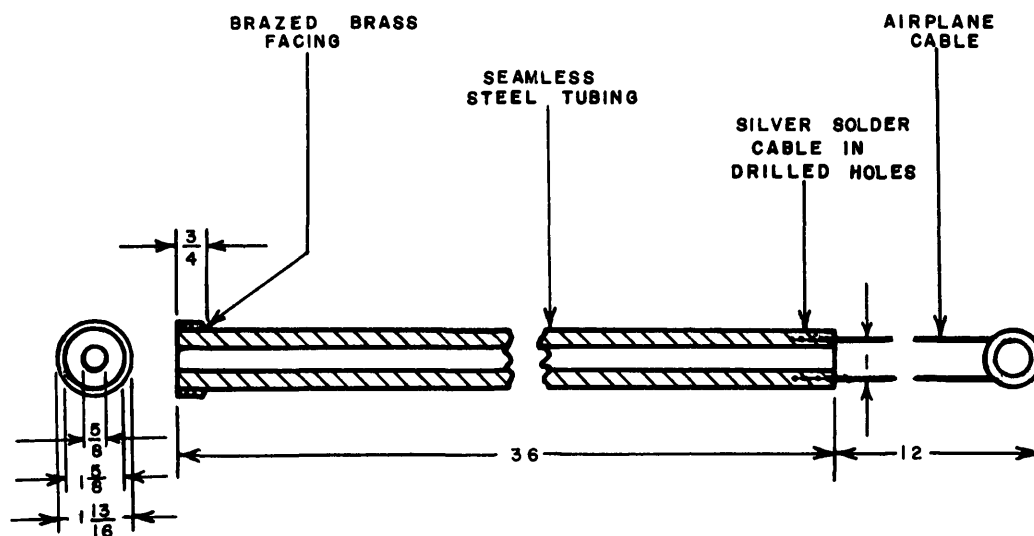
Tamping hammer for piezometer installation; all dimensions are shown in inches (After Casagrande, 1946).
